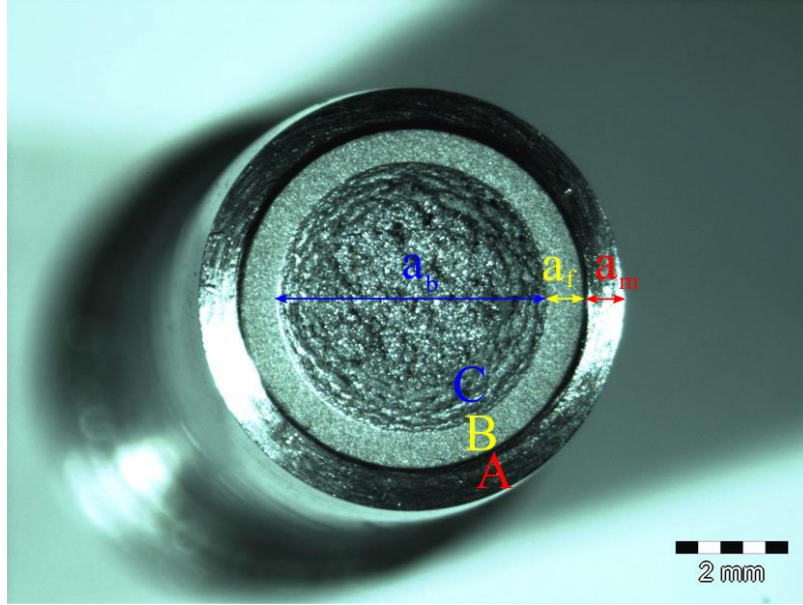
Image of the fracture surface of the specimen and defined dimensions according to regions
